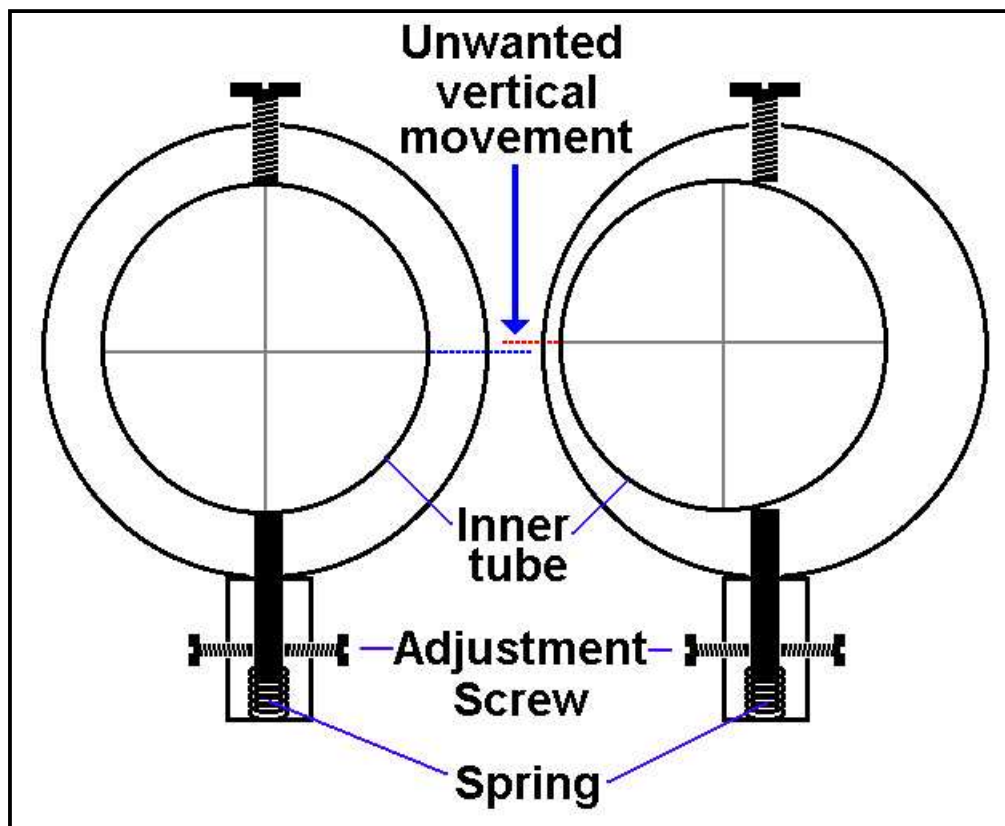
Illustration of the affect of side adjustment on the position of the inner tube. The top screw is the principal height adjustment with the horizontal screws causing side adjustment. As the inner tube is moved off centre, the spring loading causes unwanted upward movement.
